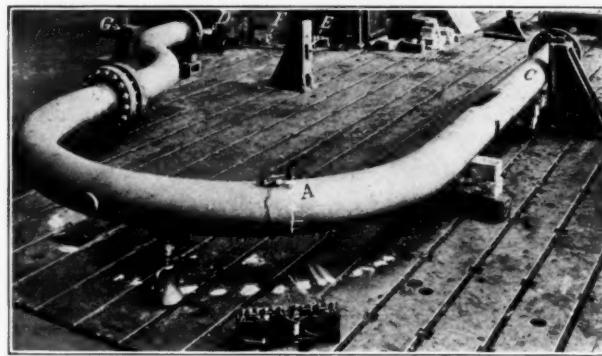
PIPE-BEND TEST ARRANGEMENT
